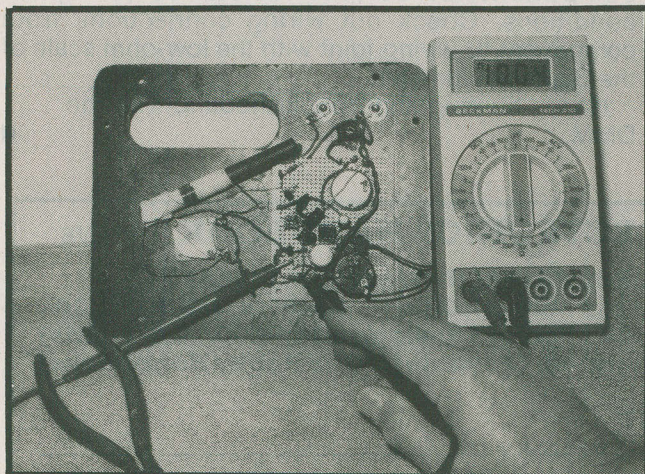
Low resistance measurements between wiring and parts may locate a poorly soldered connection. Check each resistor for correct resistance. Remove one end of the resistor.
